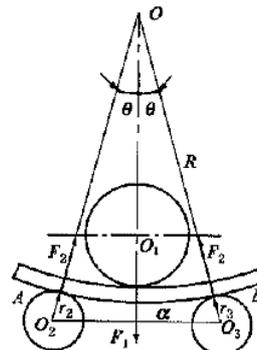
Force analysis of roll bending (www.machinemfg.com/08-02-2019)
